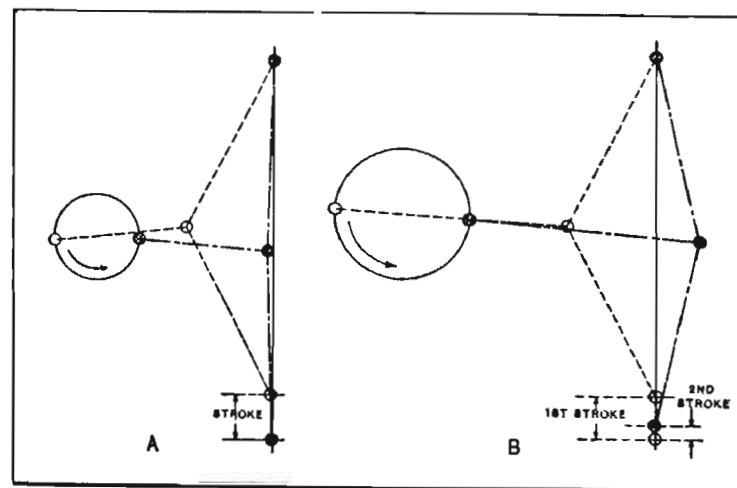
Action of Single- and Double-stroke Toggle Mechanisms
